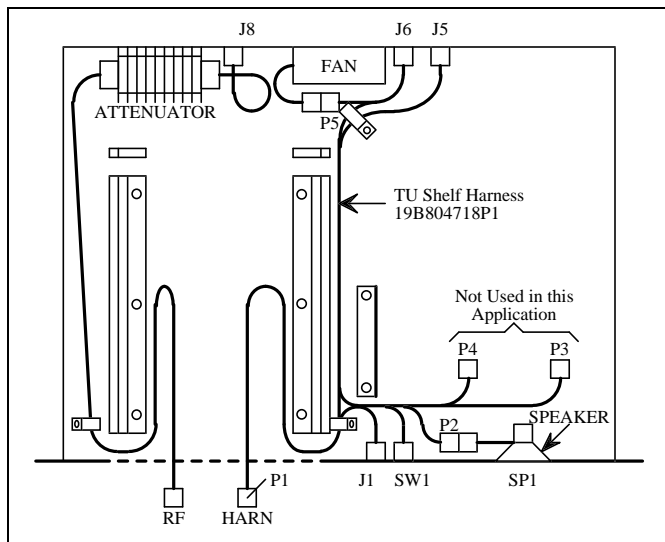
TU Shelf Cable Layout - Below 470 MHz
